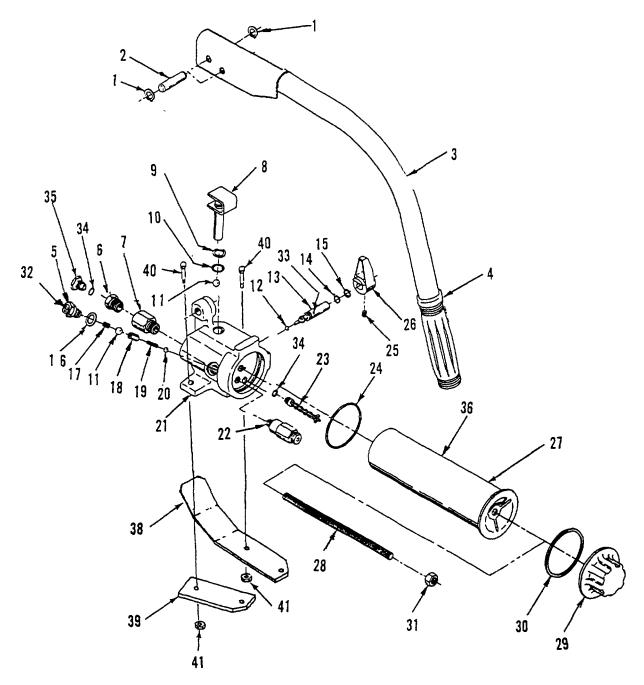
Hydraulic Pump Assembly Repair, Part Number 61780
